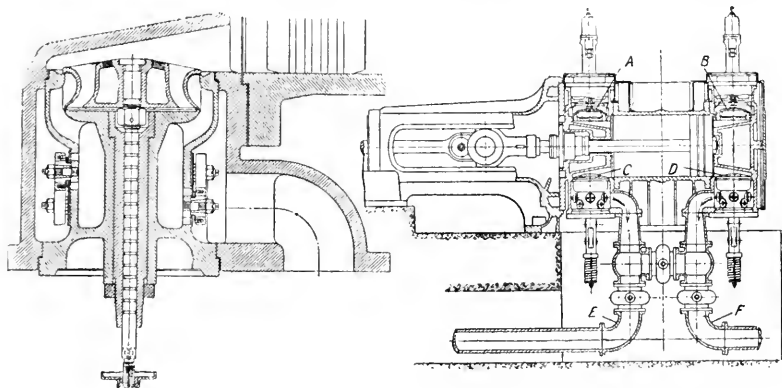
SECTION THROUGH ENGINE CYLINDER OF AN ATLAS PASS-OUT ENGINE
